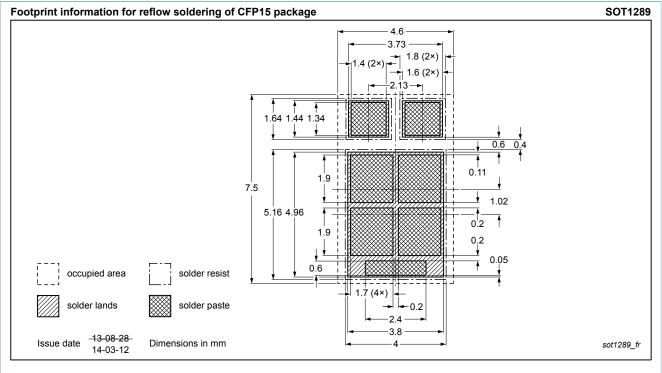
Reflow soldering footprint for CFP15 (SOT1289)
